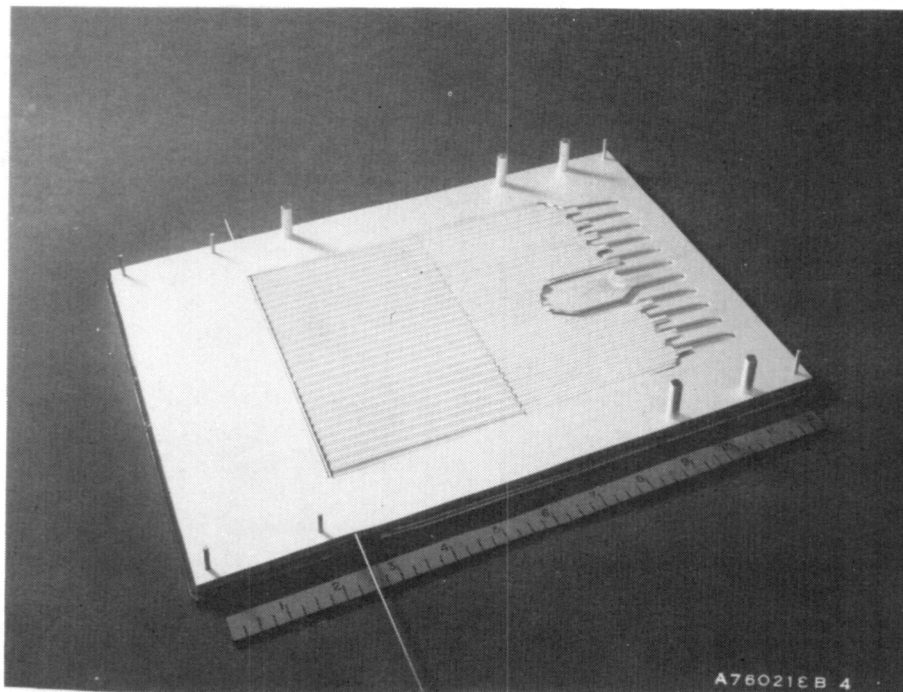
End Panel/Internal Stringer Termination Specimen (EPISTS)—
